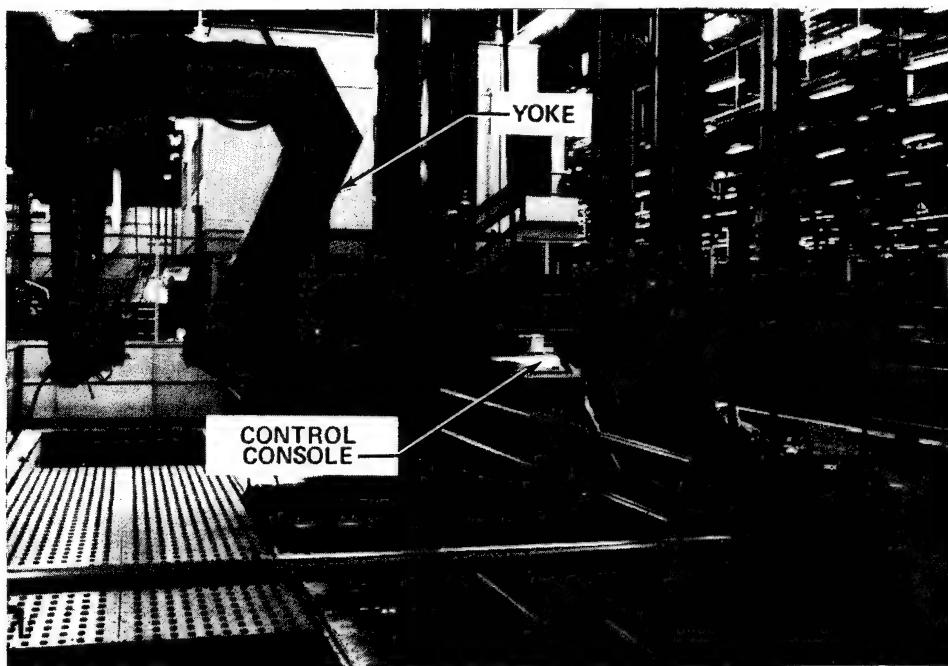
Automated Through-Transmission Ultrasonic Inspection—
